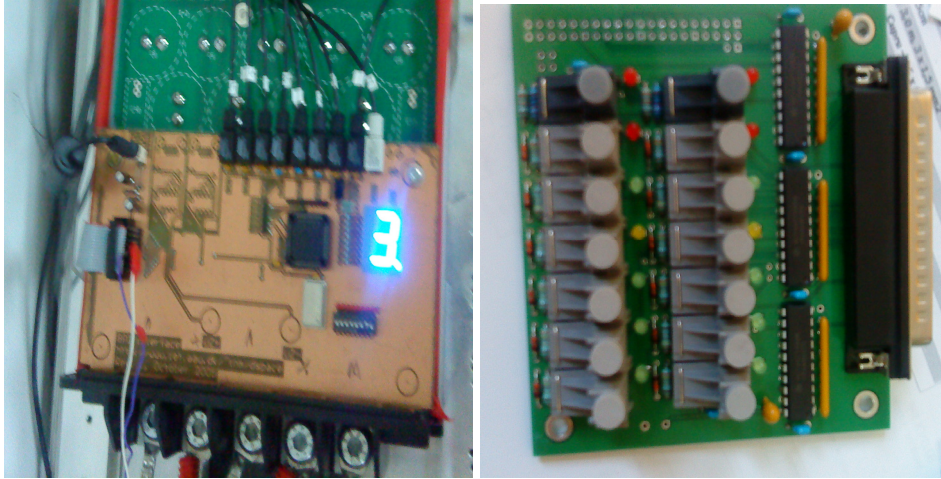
BPI inverter with custom build interface board and optic connection PCB
